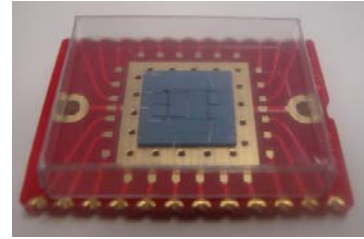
2-DoF velocity sensor placed on PCB package and wire bonded to the PCB bonding pads
